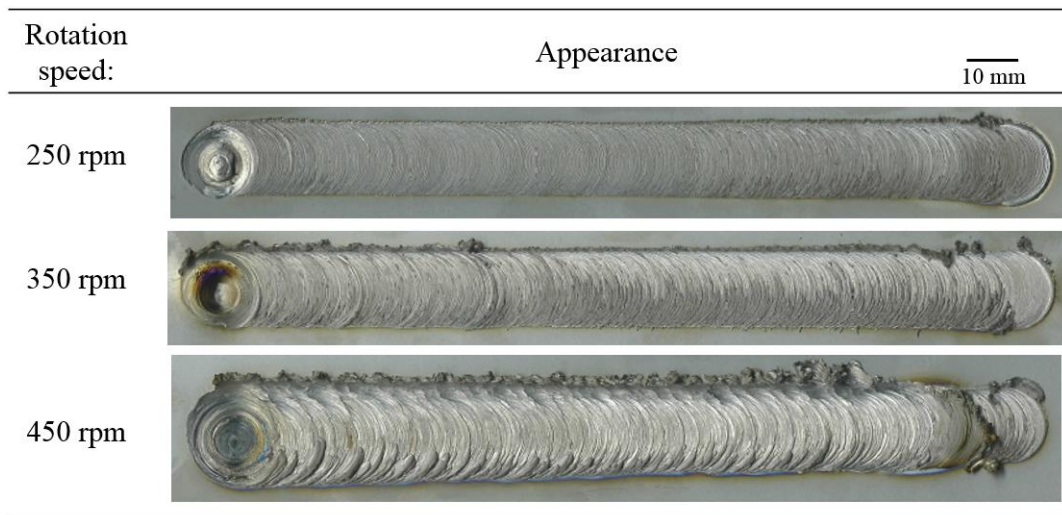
Appearances of the lap joints of CP-Ti and SPCC with different rotation speeds of 250, 350 and 450 rpm at constant welding parameters of 100 mm/min and load 9.8 kN.
